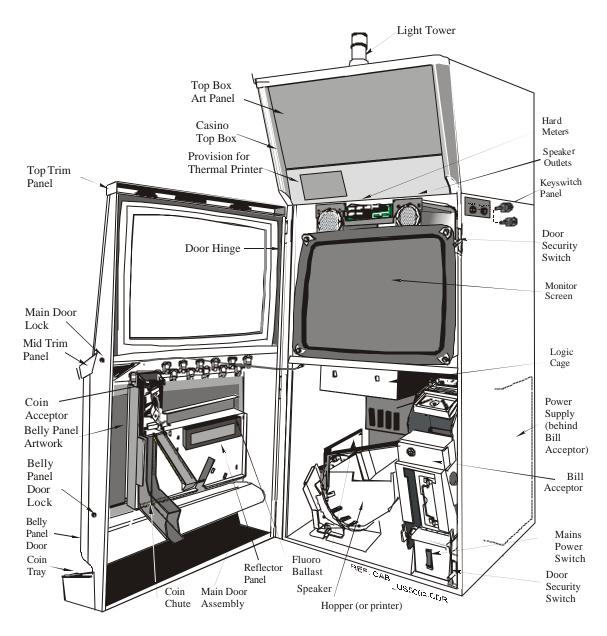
Typical MAV500 Video Gaming Machine with Bill Acceptor - Internal View
